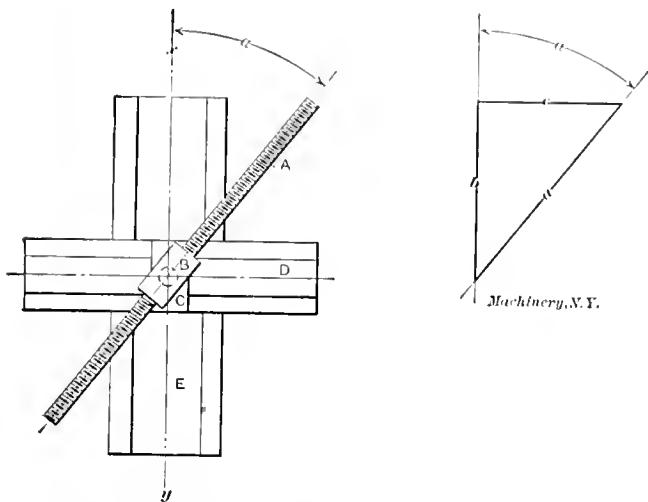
The Mechanism by which the Proper Ratio of Rolling Movement for the Blank and Tool is obtained for the Machine in Fig. 168.
